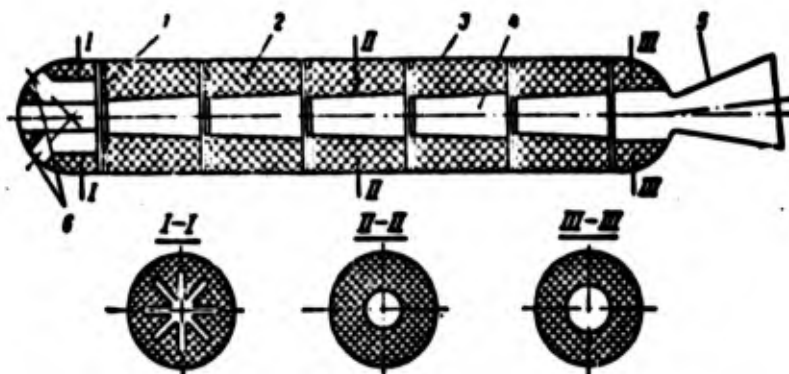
Internal-burning SRE. 1) Partition; 2) fuel charge; 3) case; 4) internal channel; 5) nozzle; 6) motor-cutoff and thrust-reversal elements.
